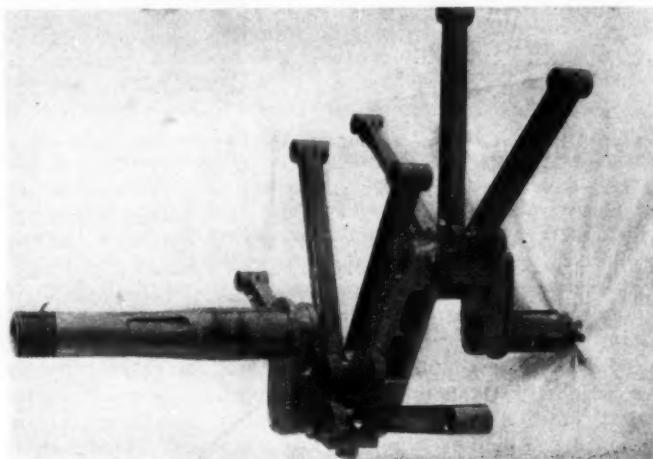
Two-throw Crankshaft of Esnault-Pelterie Seven-Cylinder Aeronautical Engine.
